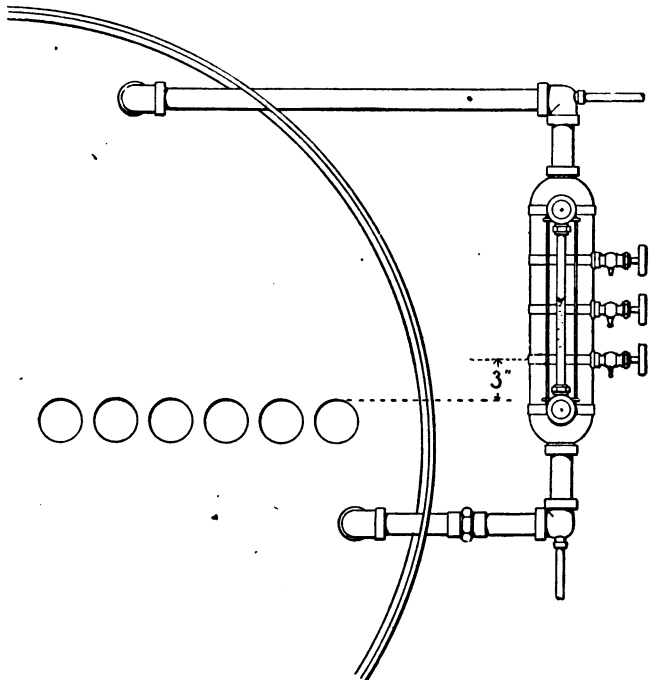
SHOWING HOW TO CONNECT THE WATER COLUMN.
